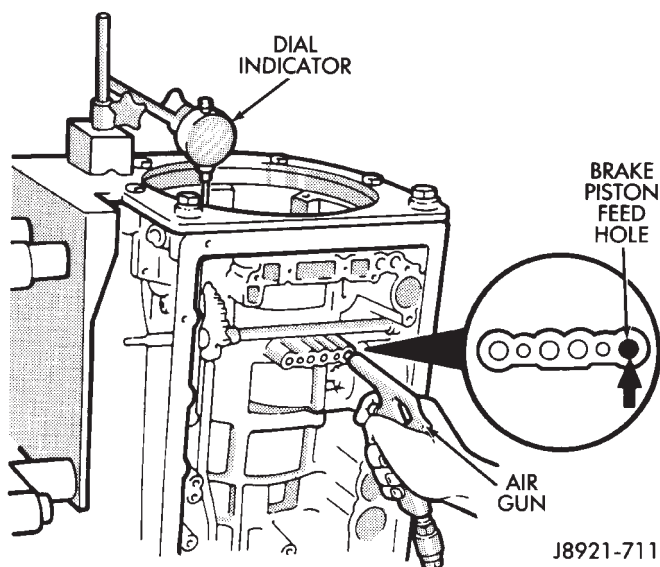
Positioning Gauge Tool And Dial Indicator
